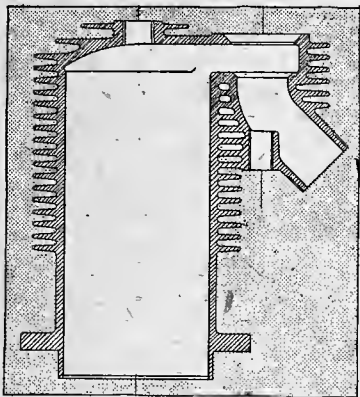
A common type of cast iron cylinder with super imposed valves, the exhaust valve being parallel with the bore of the cylinder and the inlet valve overhead.
